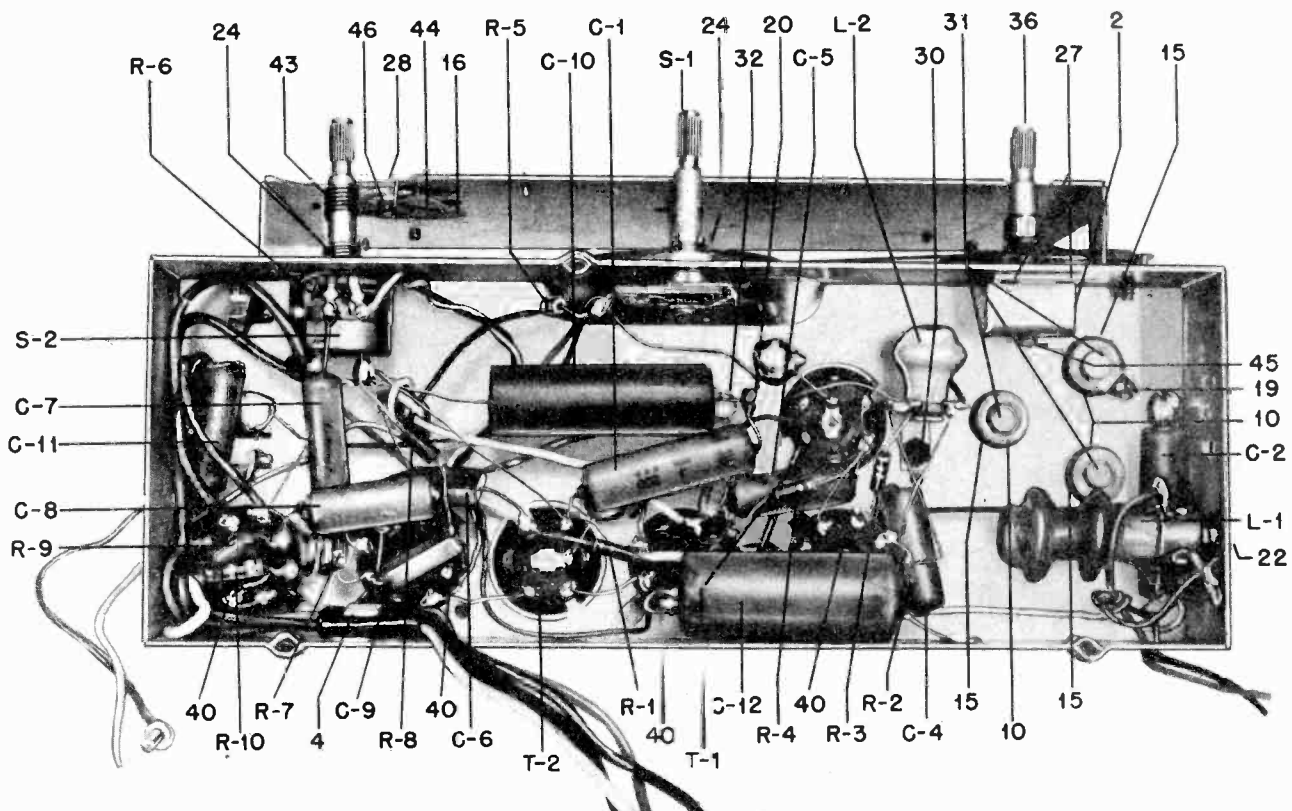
PARTS LOCATION - CHASSIS BOTTOM
